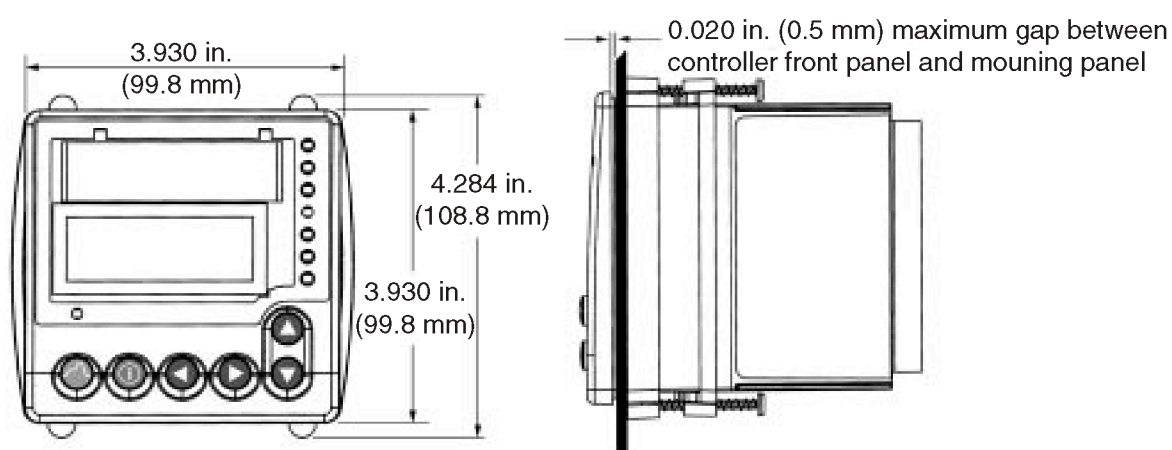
Front View Dimensions and Gasket Gap Dimension.
